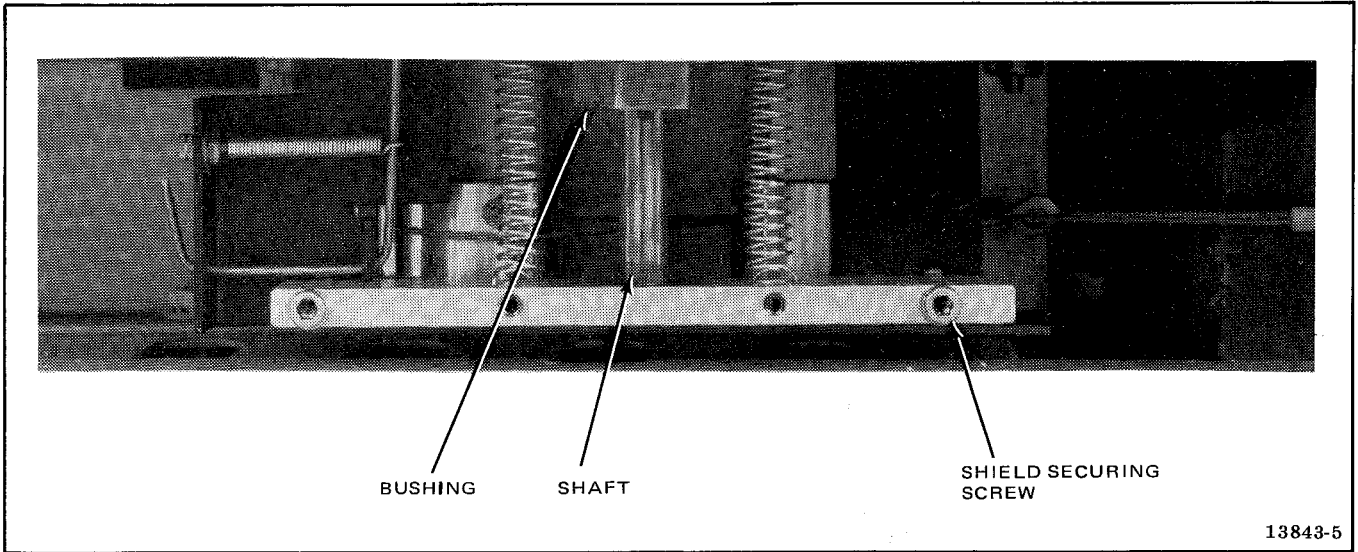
Head Gate in Latched (Down) Position, Front View of Transport
